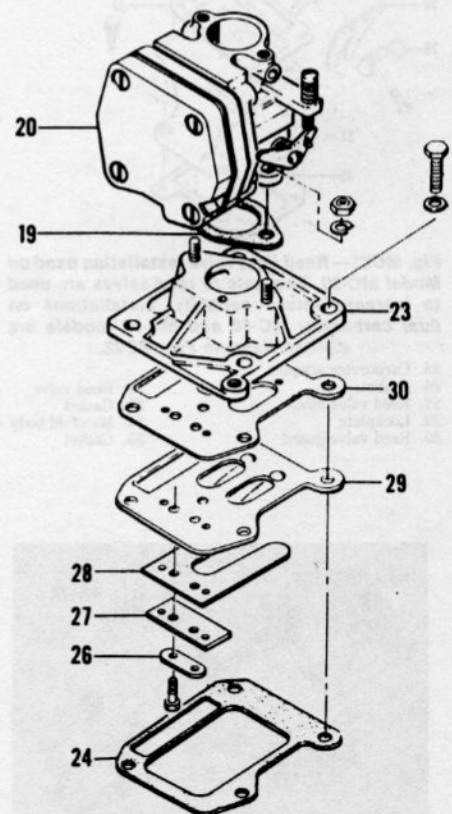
Carburetor mounting and inlet reed valve system on Models MC-2 and MC-20. Some other models are similar except reed guards are used.
